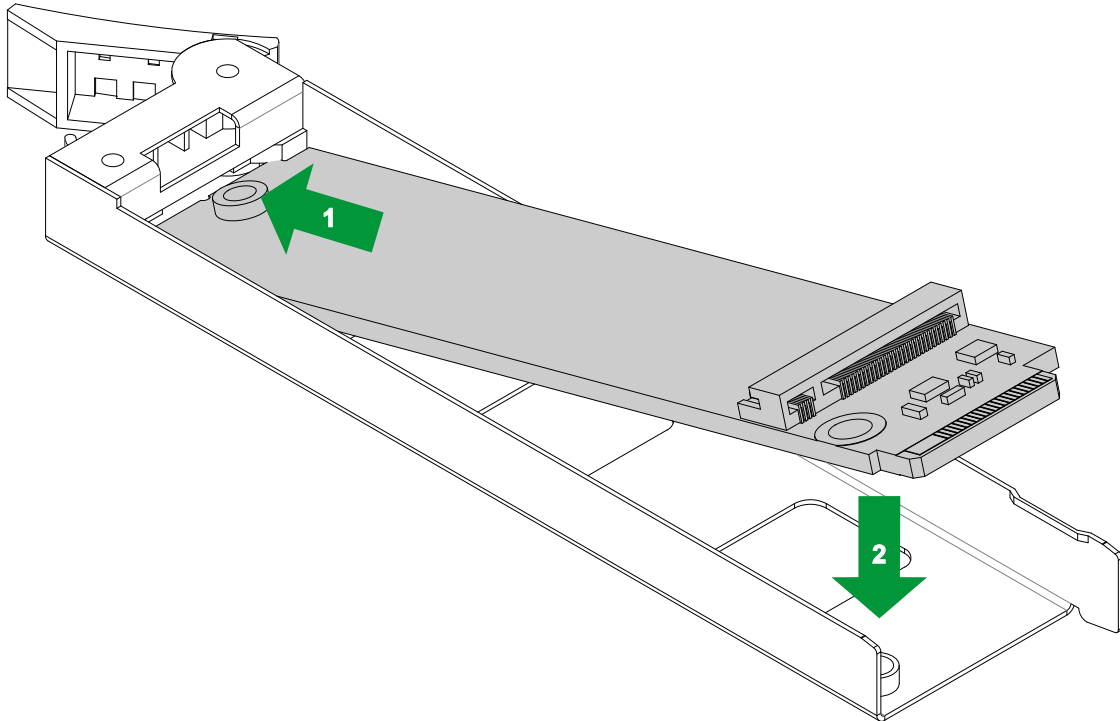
Install M.2 Adapter Board Into the Adapter Tray
